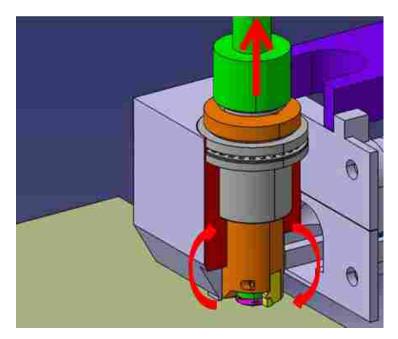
Driver Moves Up, Flash Cutter Stays Engaged with Surface and Cuts Flash
